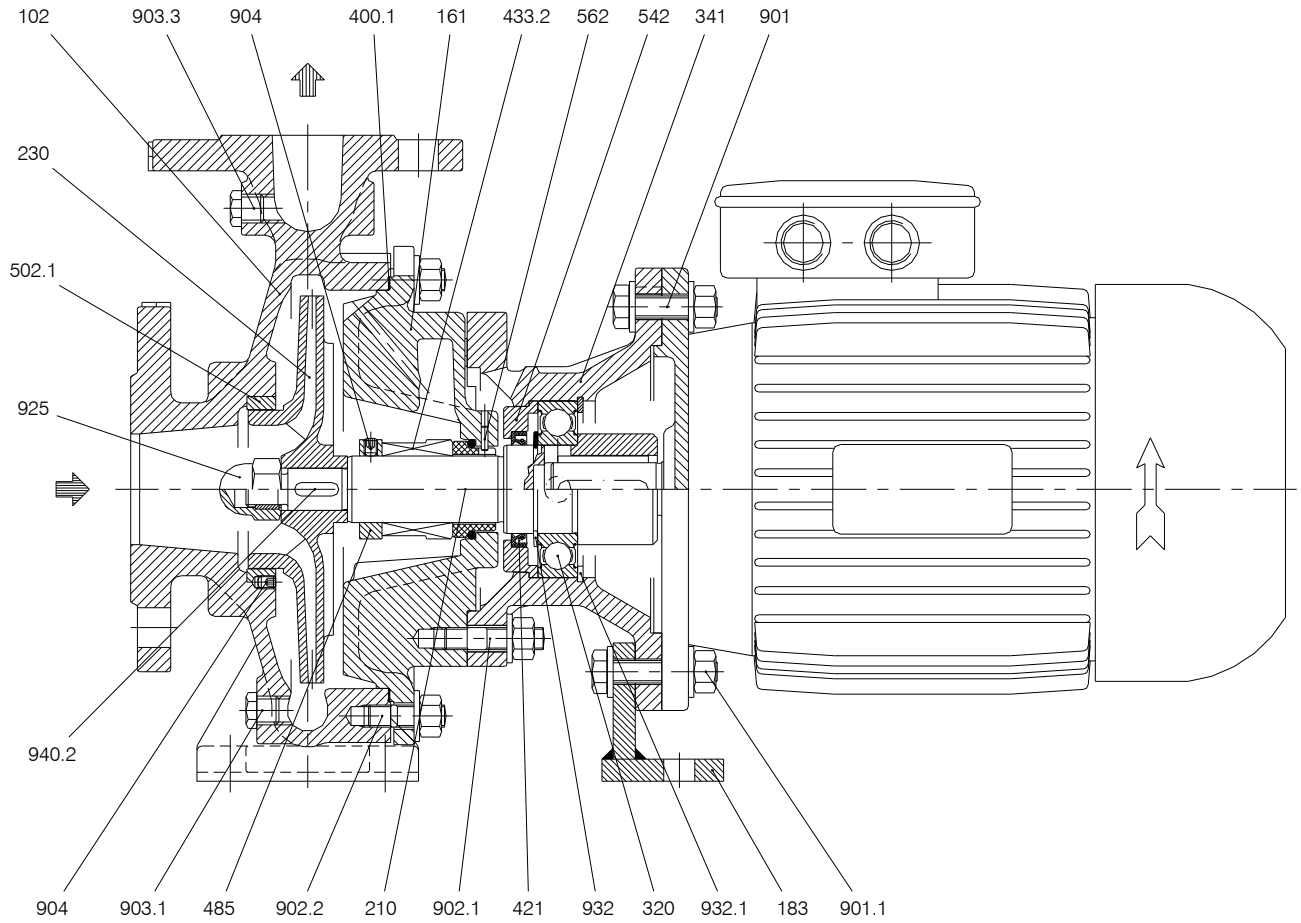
Pump series TCHM gr. 1 and 2 design /1-C = Single mechanical seal and motor frame 80 and 90
